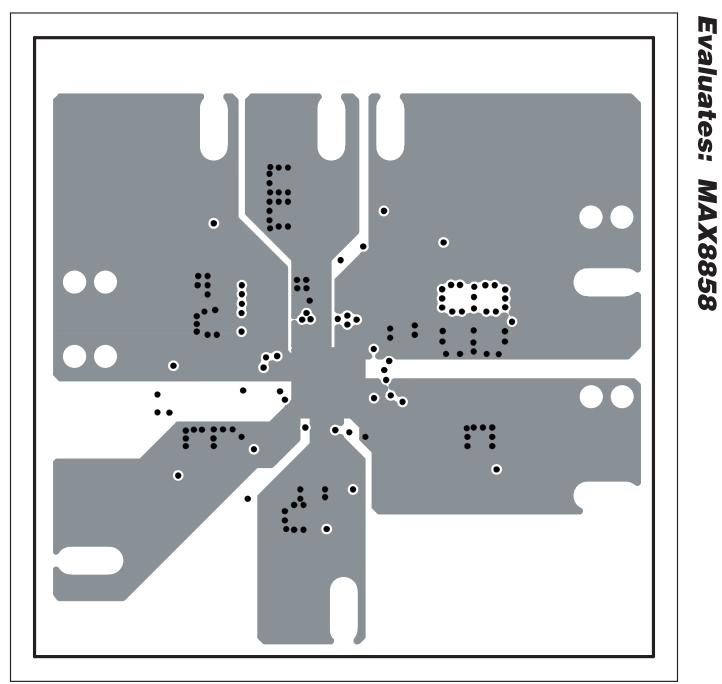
MAX8858 EV Kit PCB Layout—GND Inner Layer 2
